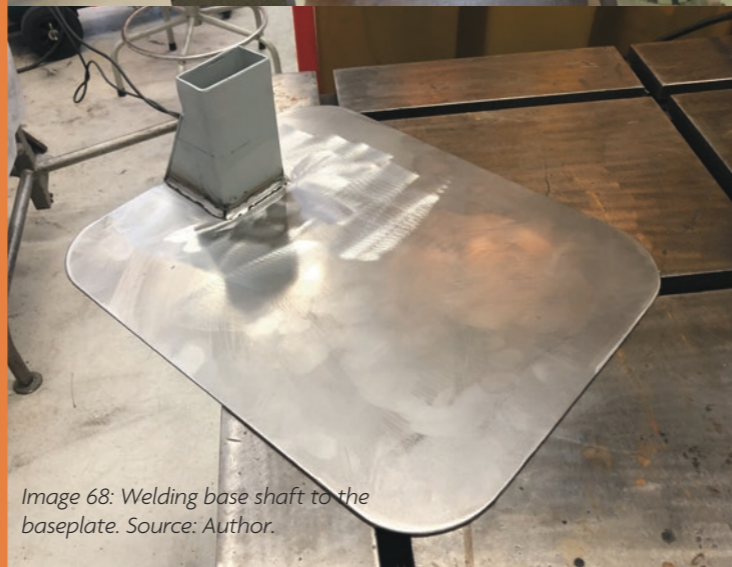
Welding base shaft to the baseplate. Source: Author.
